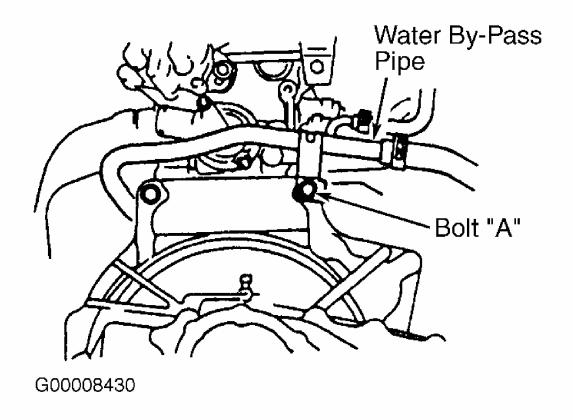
Locating Coolant By-Pass Pipe Bolt "A" (Protege) Courtesy of MAZDA MOTOR CORP.
